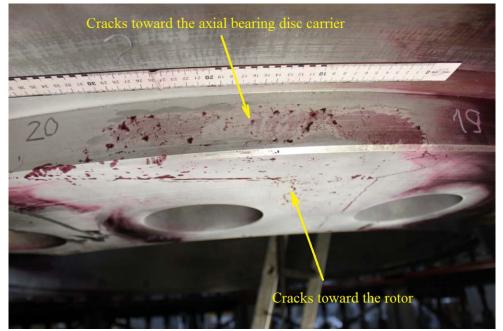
Cracks in the repair weld area between the hub and rotor shaft, and in the transition area from the hub toward the axial bearing (between openings for bolts nr. 19 and 20).
